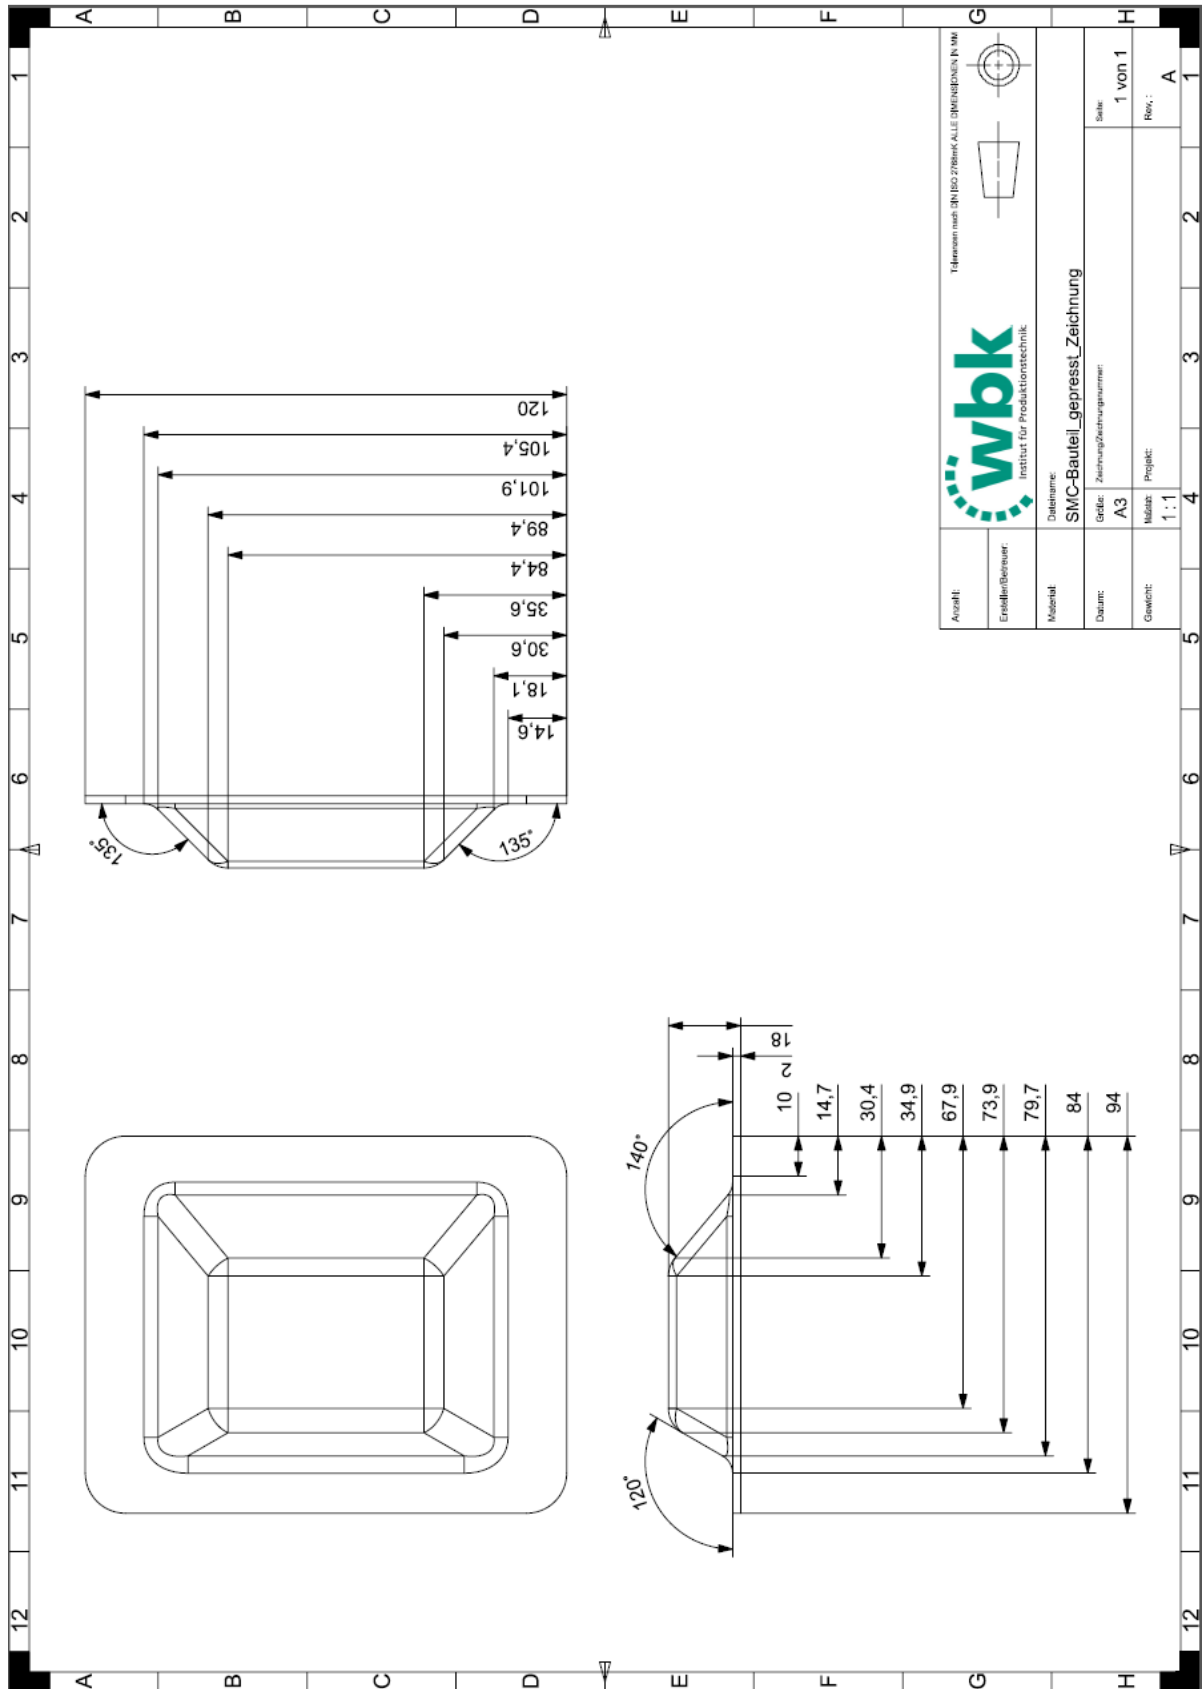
Technical drawings of small IRTG demonstrator (A\_Schwende 2017)
